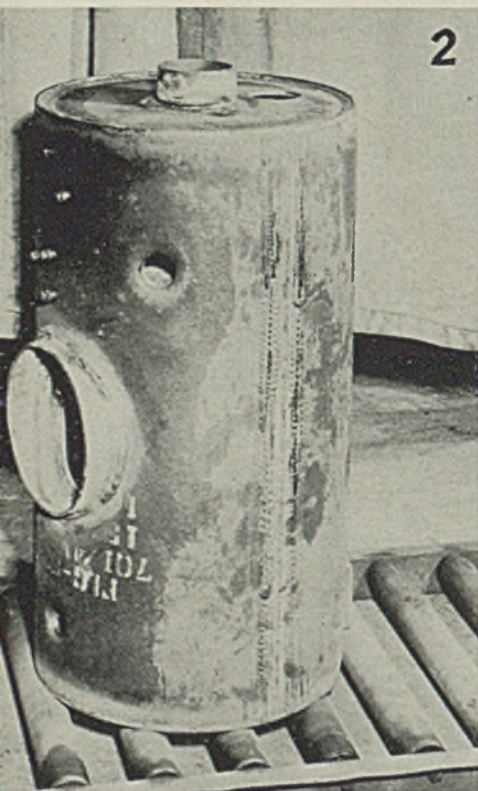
Combustion and outer shell assembly of steam and hot water boiler showing flash welded longitudinal seam and arc welded sight door and top plate
